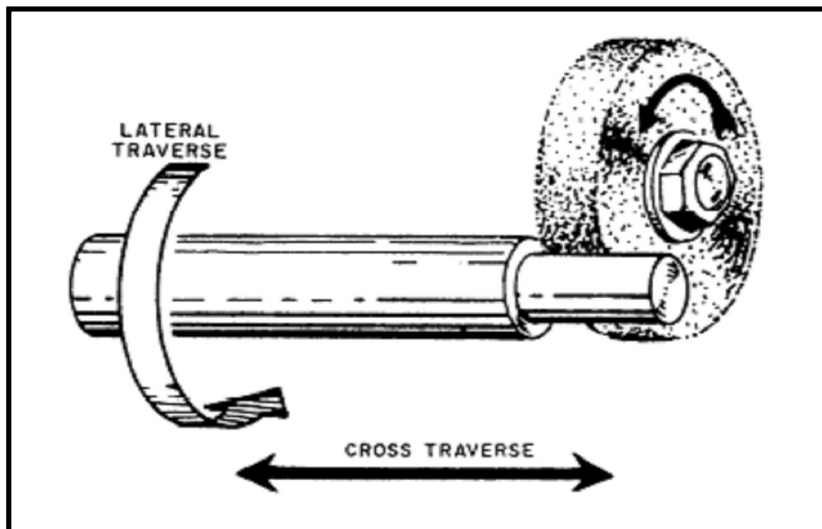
Outside Diameter (OD) grinding for cylindrical work piece.
